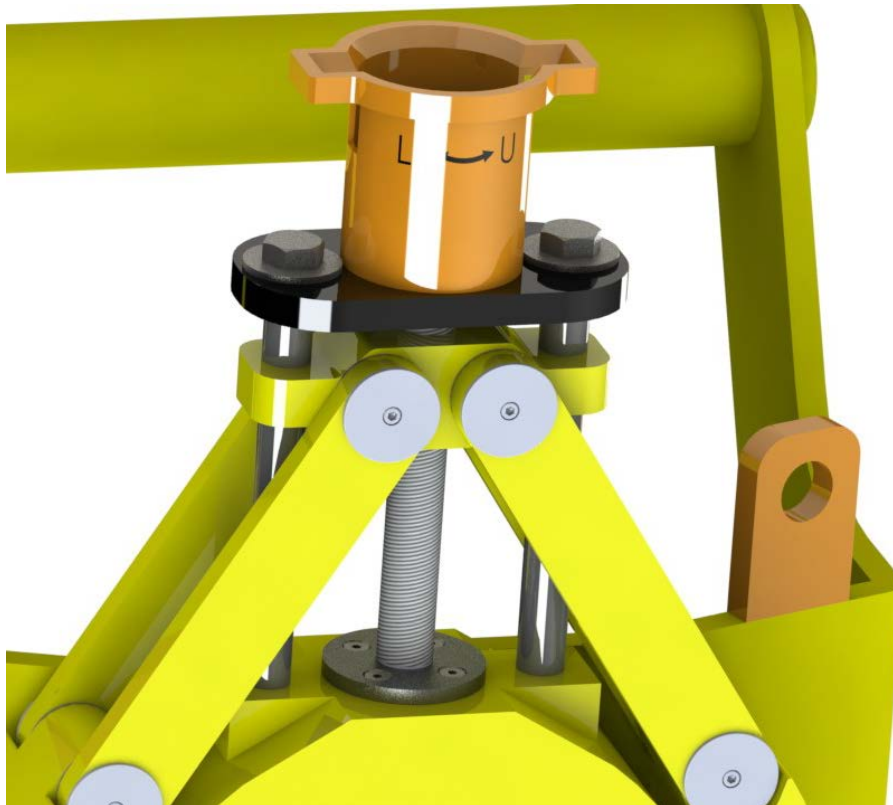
Frontside of the locking mechanism. The cap is in open position.
